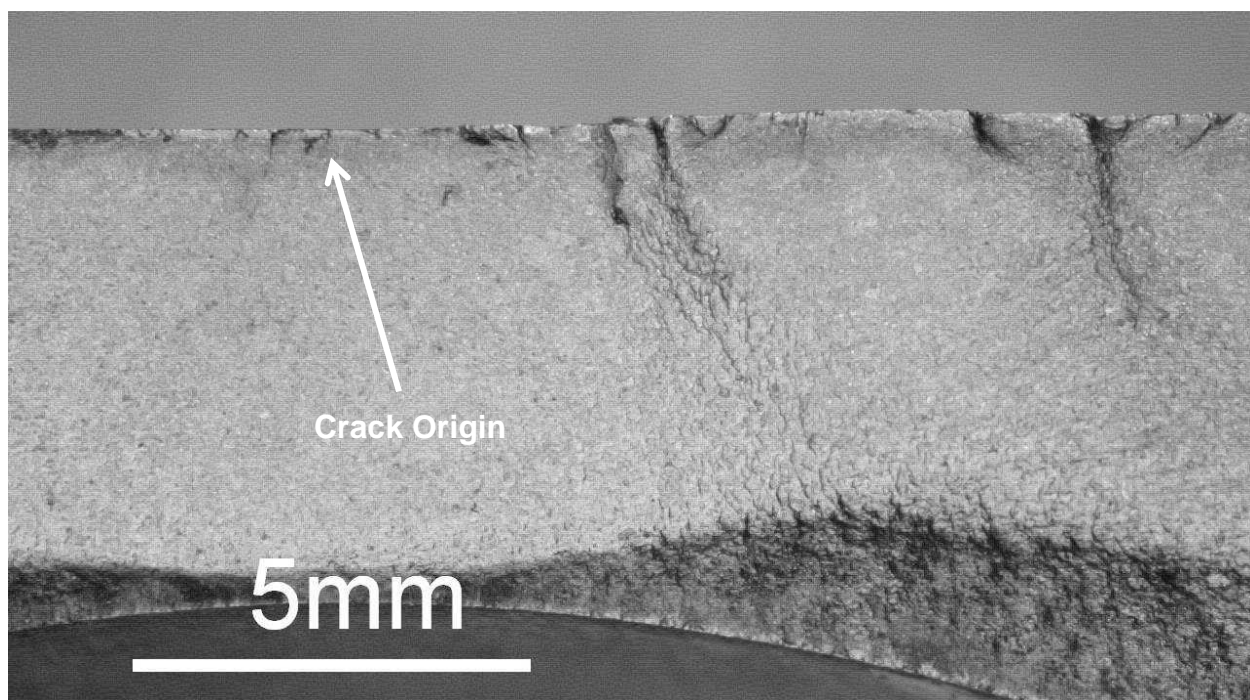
Fracture Surface View of Crack 2 (PT0099)
